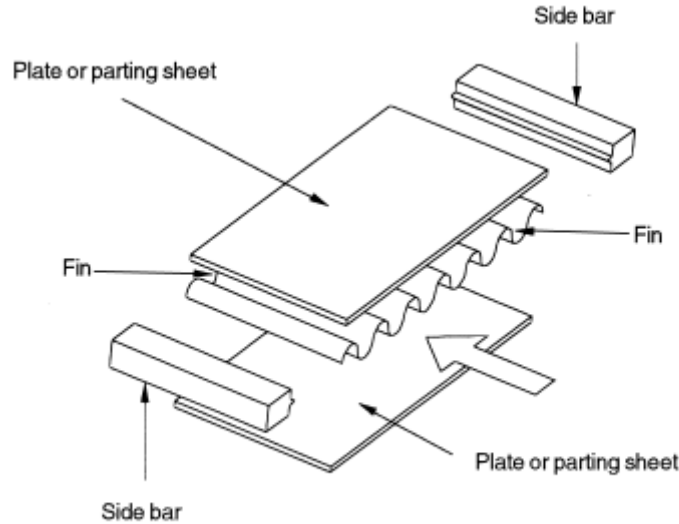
Constructional Details of Plate Fin Heat Exchanger[18]
